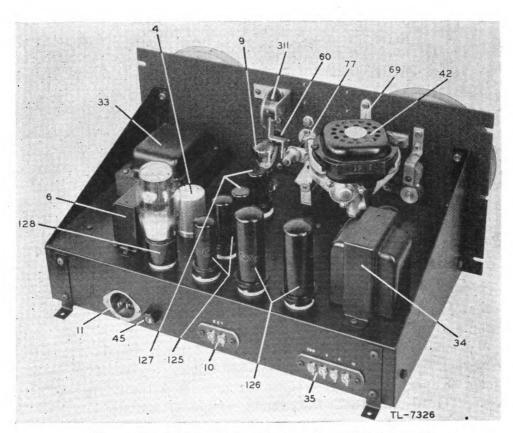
Keyer TG-10-(1), rear view, cabinet removed.
